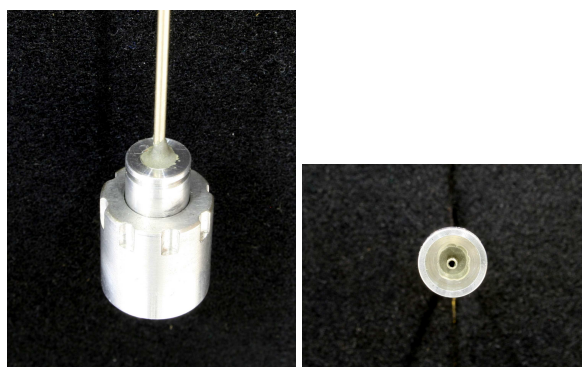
Capillary bonded to aluminum fitting. (a) View from the back of the fitting and (b) view from the front of the fitting.
